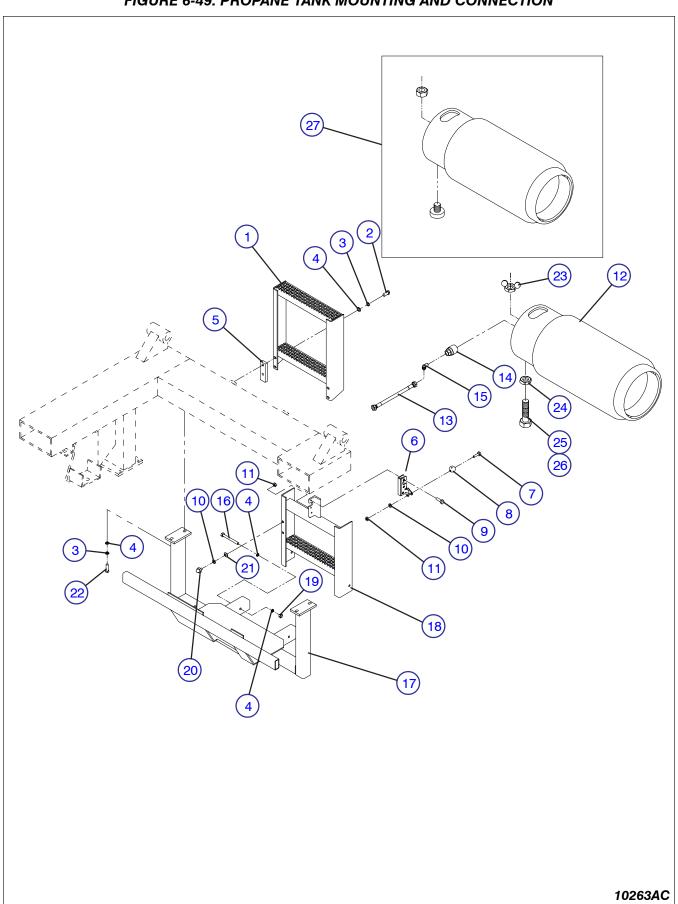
PROPANE TANK MOUNTING AND CONNECTION
